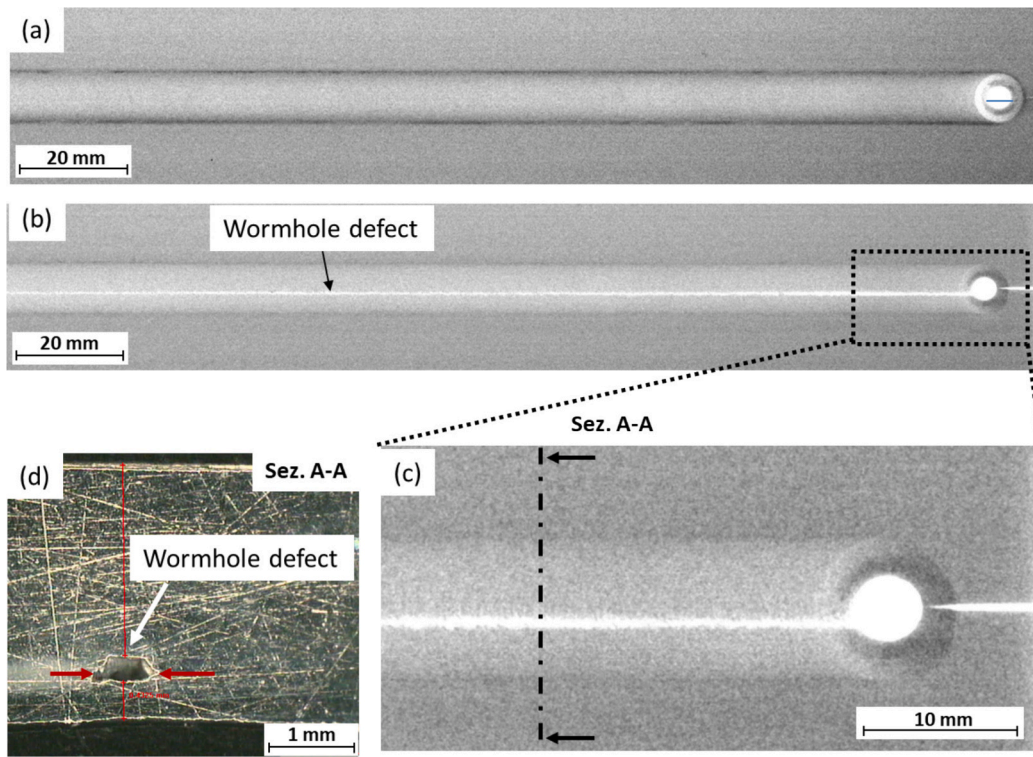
Frontal X-ray inspection showing a welded joint (a) without defect (w9) and (b) with wormhole defect (w4). (c) Magnification at the FSW tool exit hole and (d) cross section of the wormhole defect obtained by microscopic analysis.
